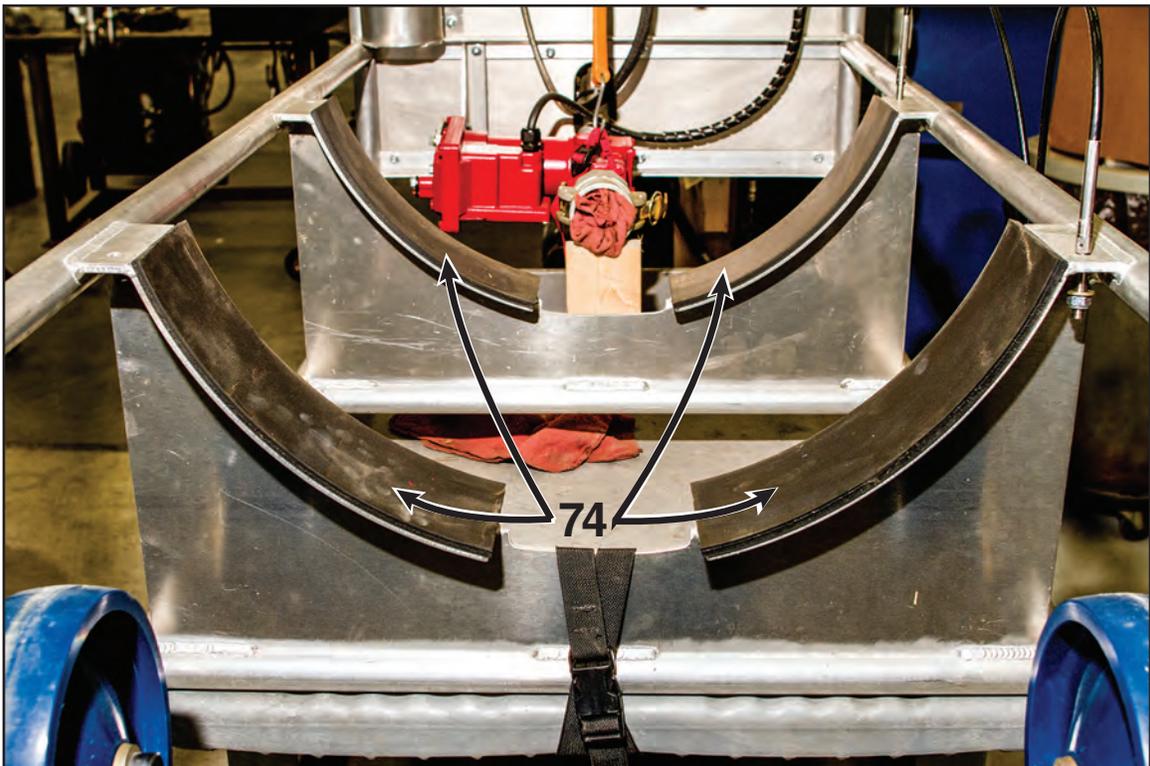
Adhesive back rubber for fuel drum cushioning.
